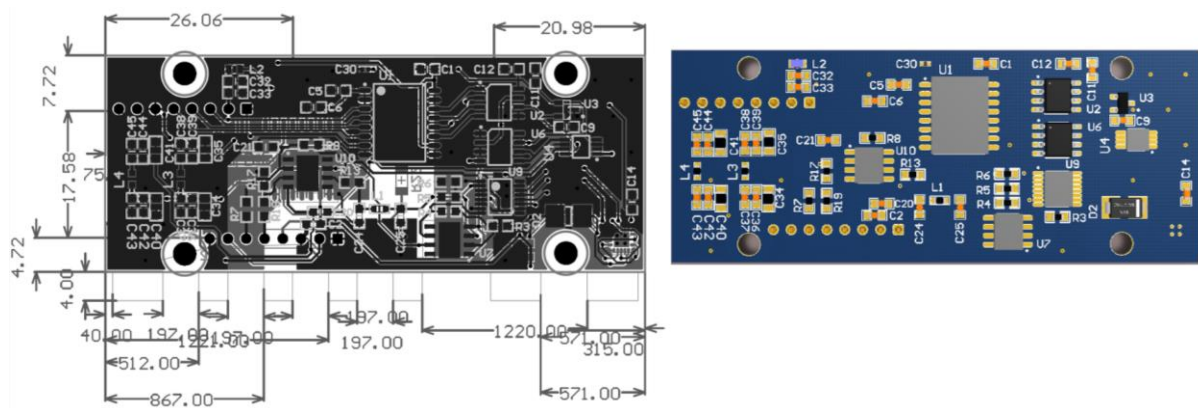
Layout of APB controller and 3D CAD model of PCB prototype.
